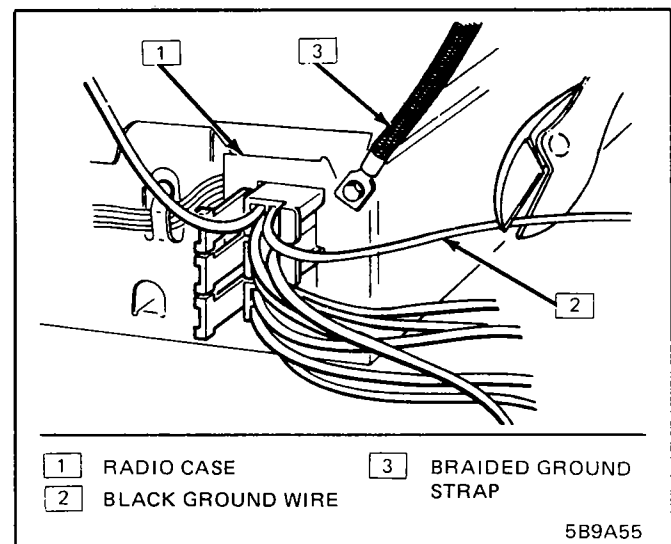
A-51 Braided Strap to Radio Case Improves Ground Connection
